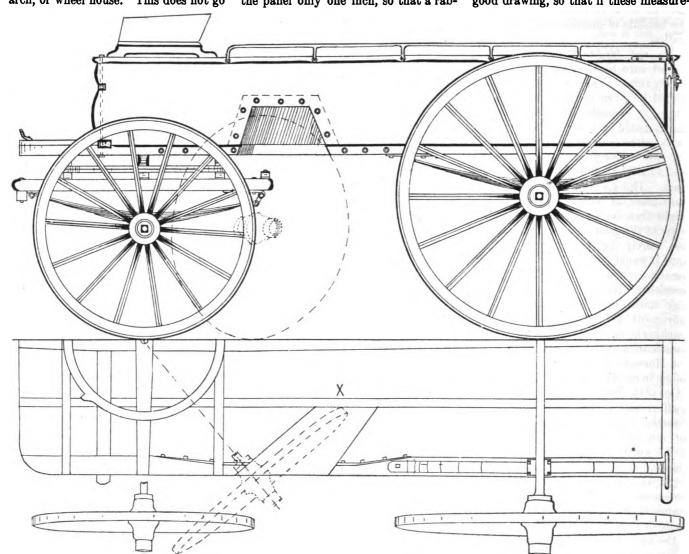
SIDE ELEVATION AND HALF PLAN OF SIMPLE FARMER'S WAGON. SCALE, 1 INCH EQUALS 18 INCHES.
